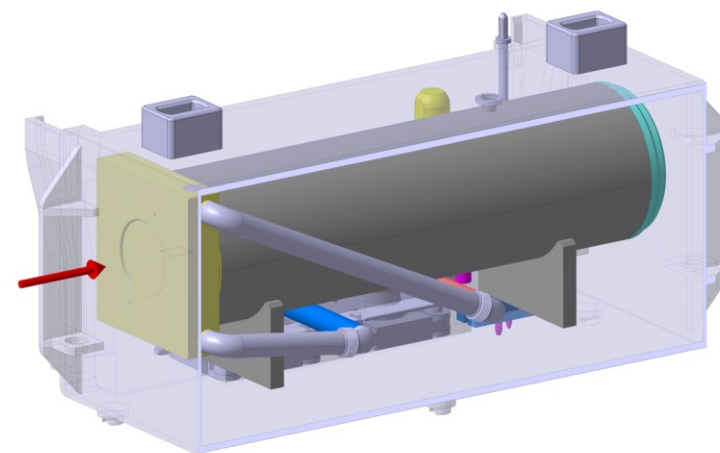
Full assembly of BDF target: view of the helium container, outer tank, upstream and downstream flanges, and inlet and outlet pipes.
